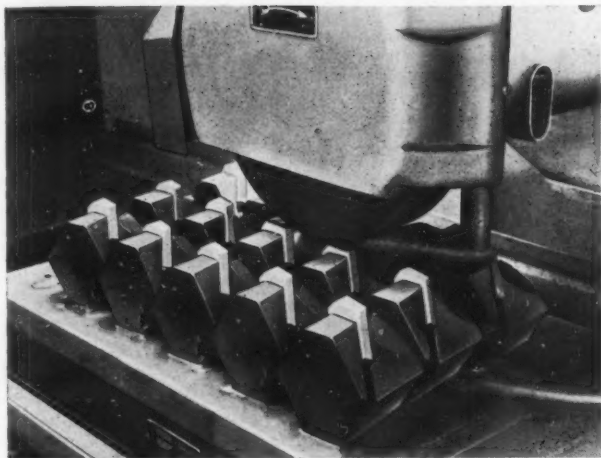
Reshaping Carbide Blades for the Large Face-milling Cutters is Simplified by Using the Blade Holders as Fixtures on a Surface Grinding Machine
